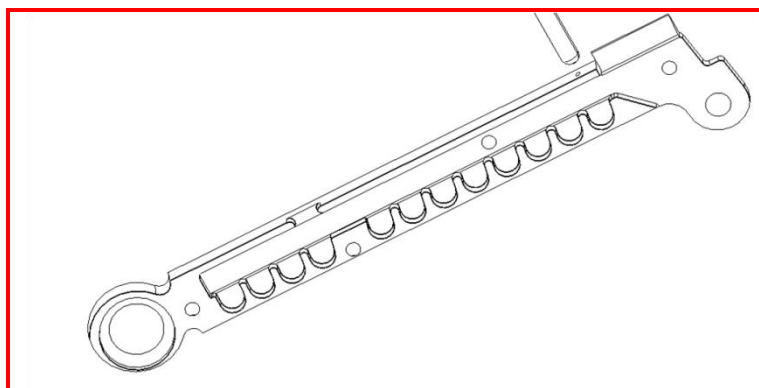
The configuration of the mold cavity for casting of the part "Comb".
